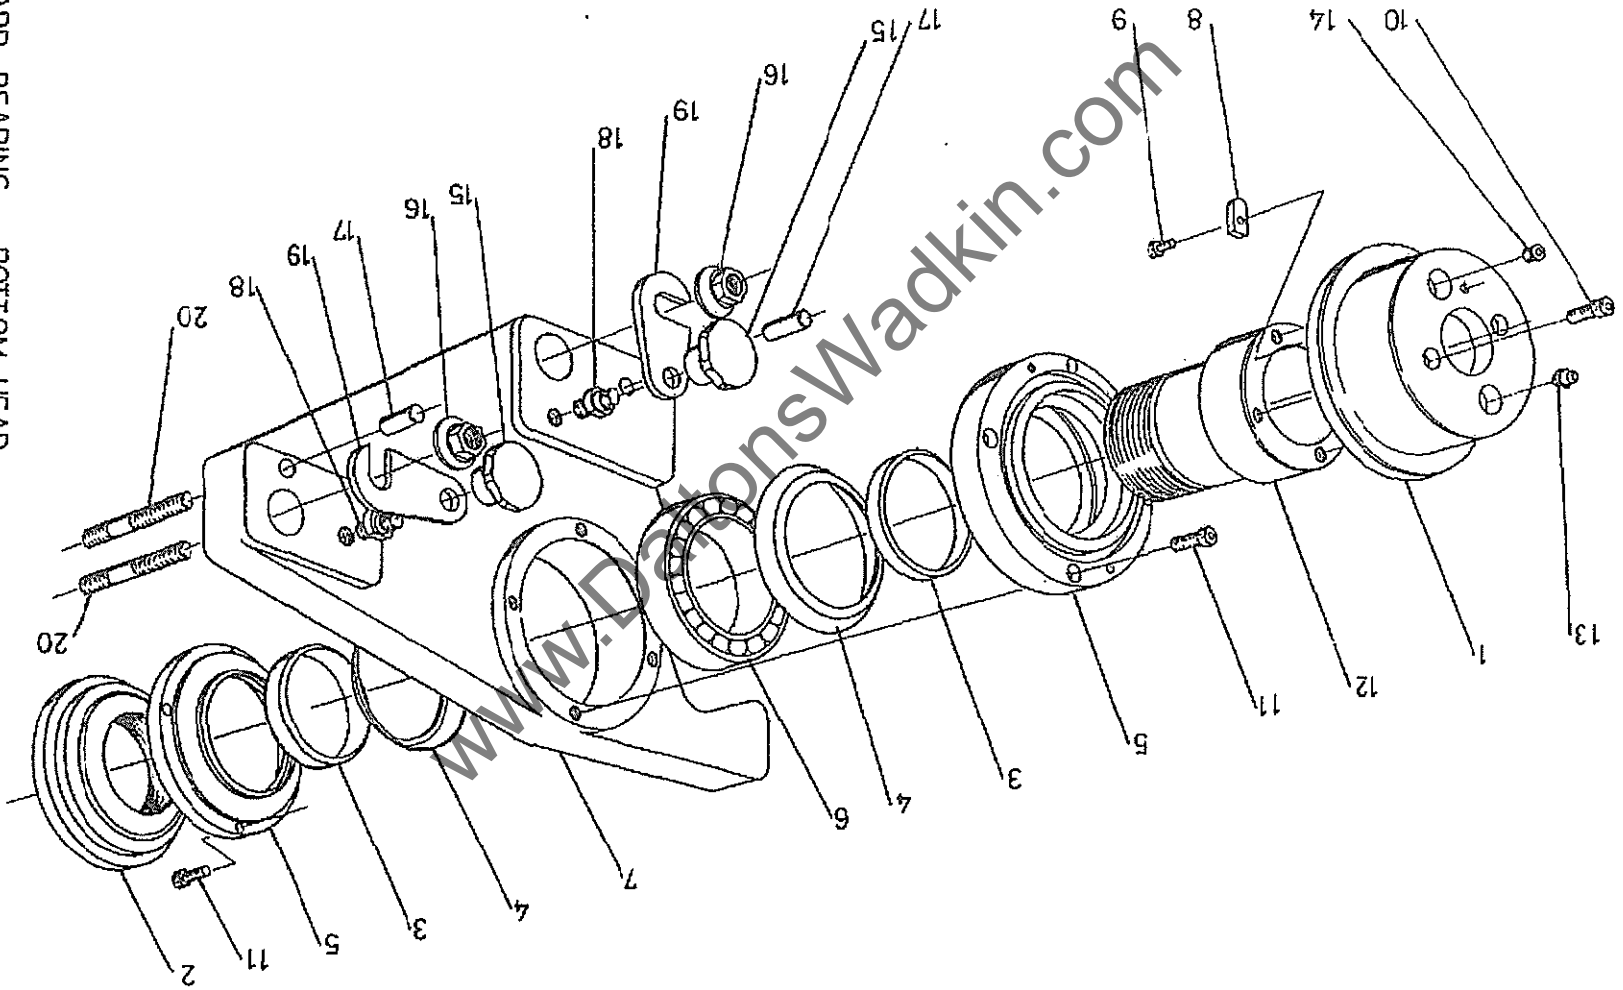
OUTBOARD BEARING - BOTTOM HEAD
